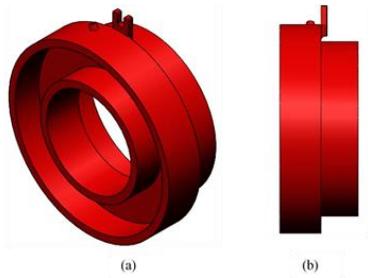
(a) Isometric View of Stator (b) Side View of Stator
